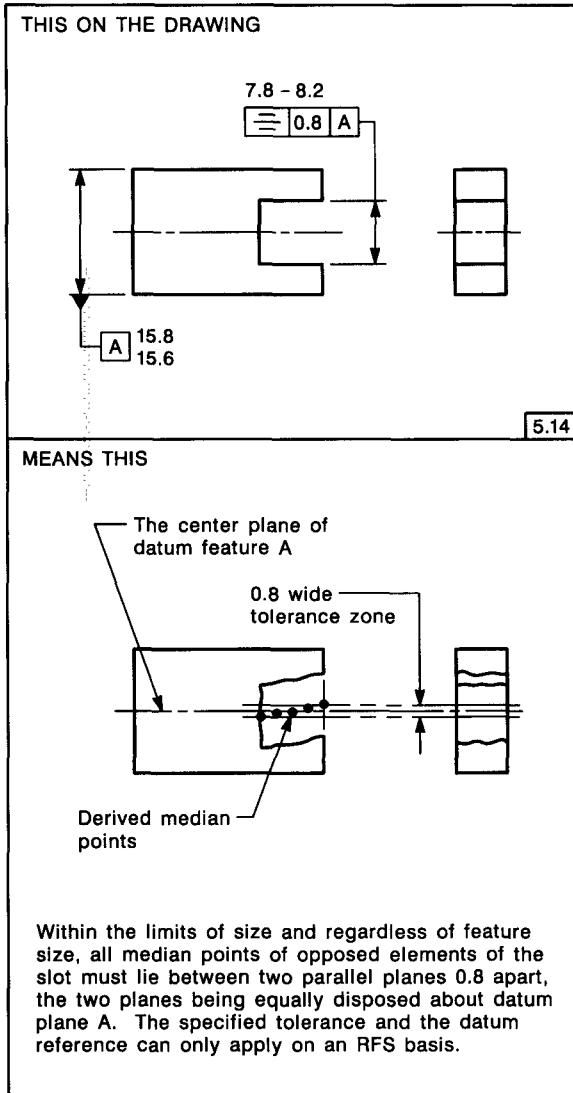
SYMMETRY TOLERANCING
